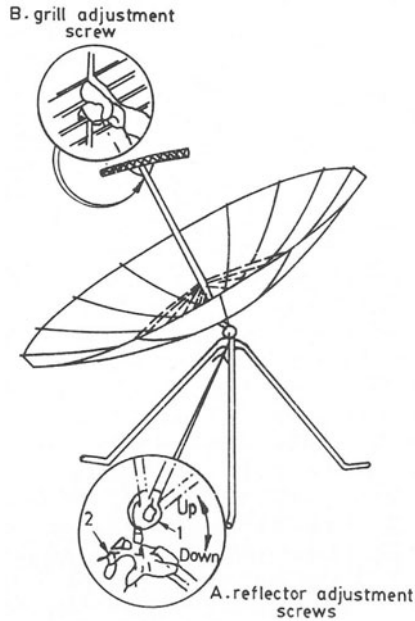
SKETCH OF UMBRELLA TYPE SOLAR COOKER
